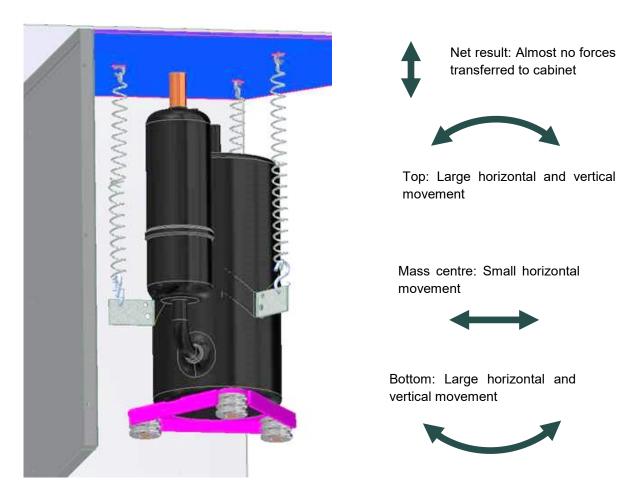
Suspension of compressor for vibration dampening. Magenta coloured part in bottom shows location of traditional dampening parts.
